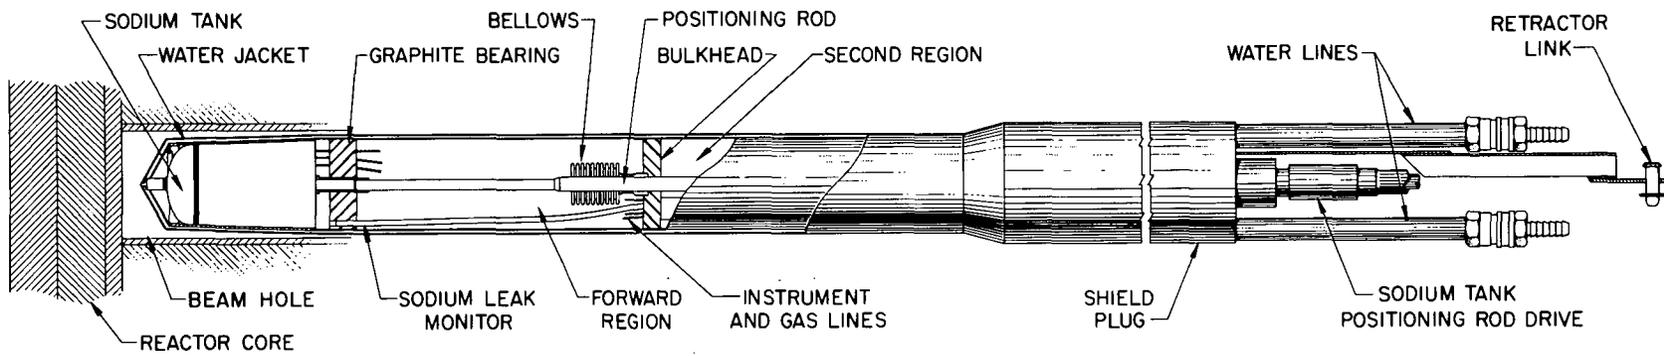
ORNL-MTR-47-3 Molten-Salt-Fueled Capsule Test Assembly.
